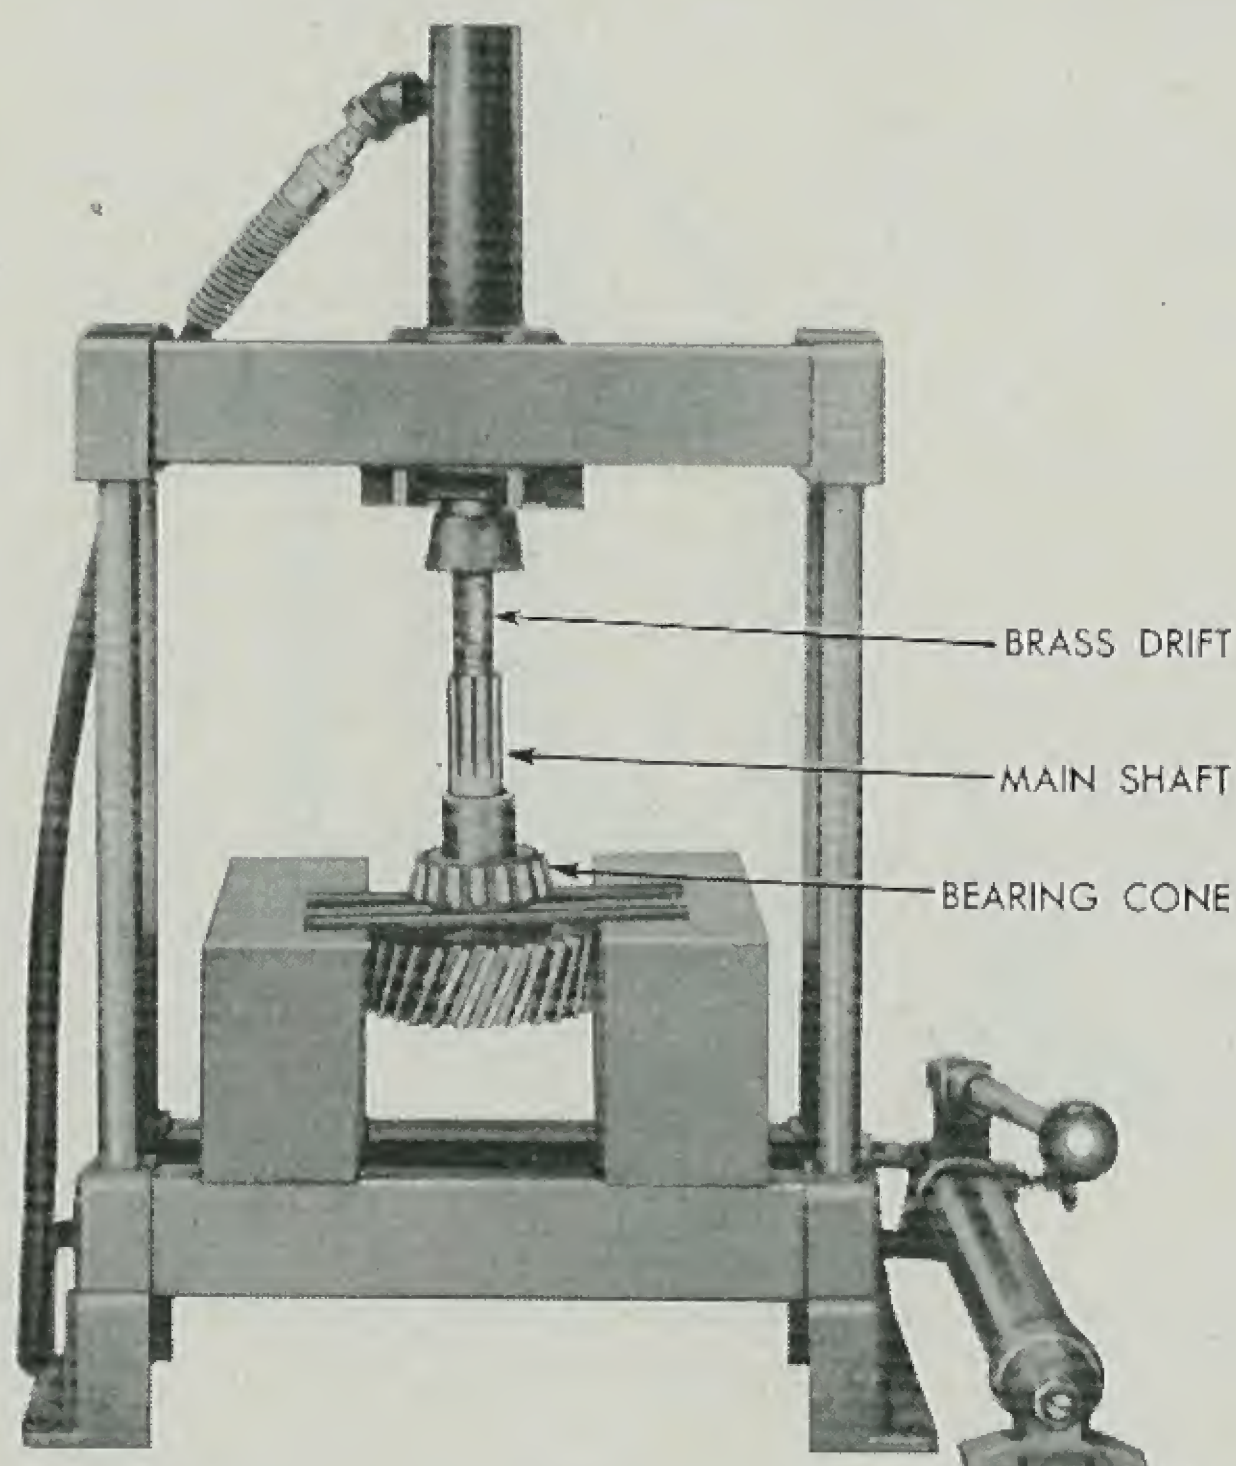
Pressing Bearing Cone and Sliding Gear off Input Shaft
